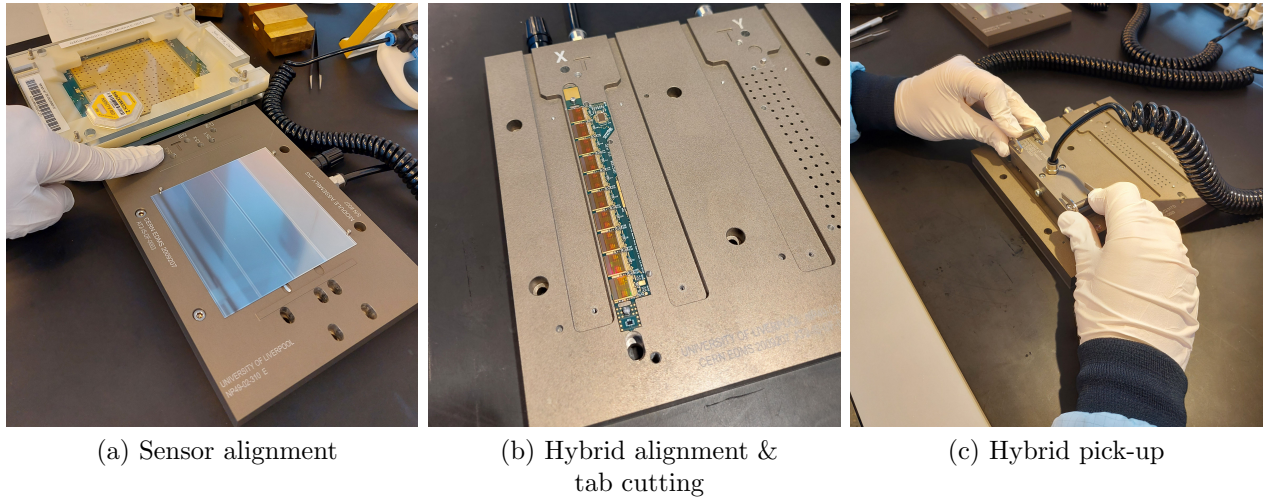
(a) A sensor on the module assembly jig ready for gluing, also shown is the sensor transport frame complete with shock watch. (b) An X-hybrid on the hybrid alignment jig, ready for the hybrid tabs to be cut off. (c) A hybrid pick-up tool being used on an X-hybrid.
